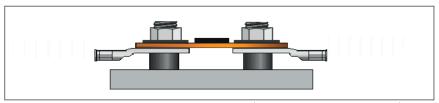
HV BM 1.2+S, mounting the ring terminals (cable cross sections ≤35 mm²)
